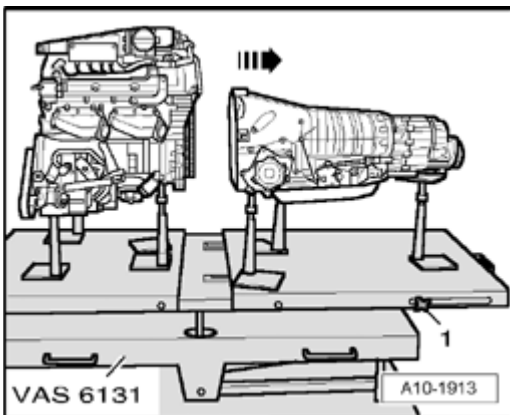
Pulling Rear Platform Top With Transmission Toward Rear Simultaneously Pushing Torque Converter Through Opening Of Drive Plate
